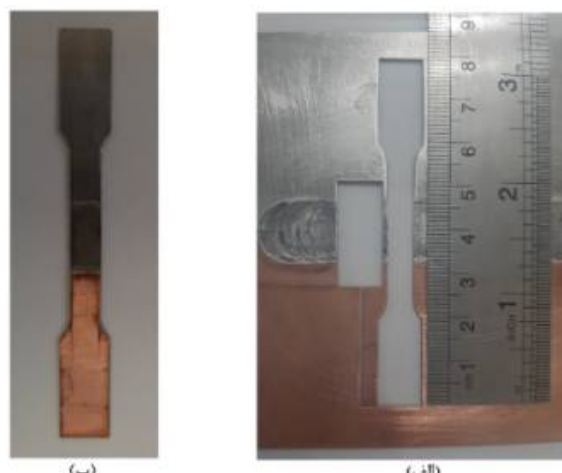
a) Sampling of joints, b) Tensile test specimen
